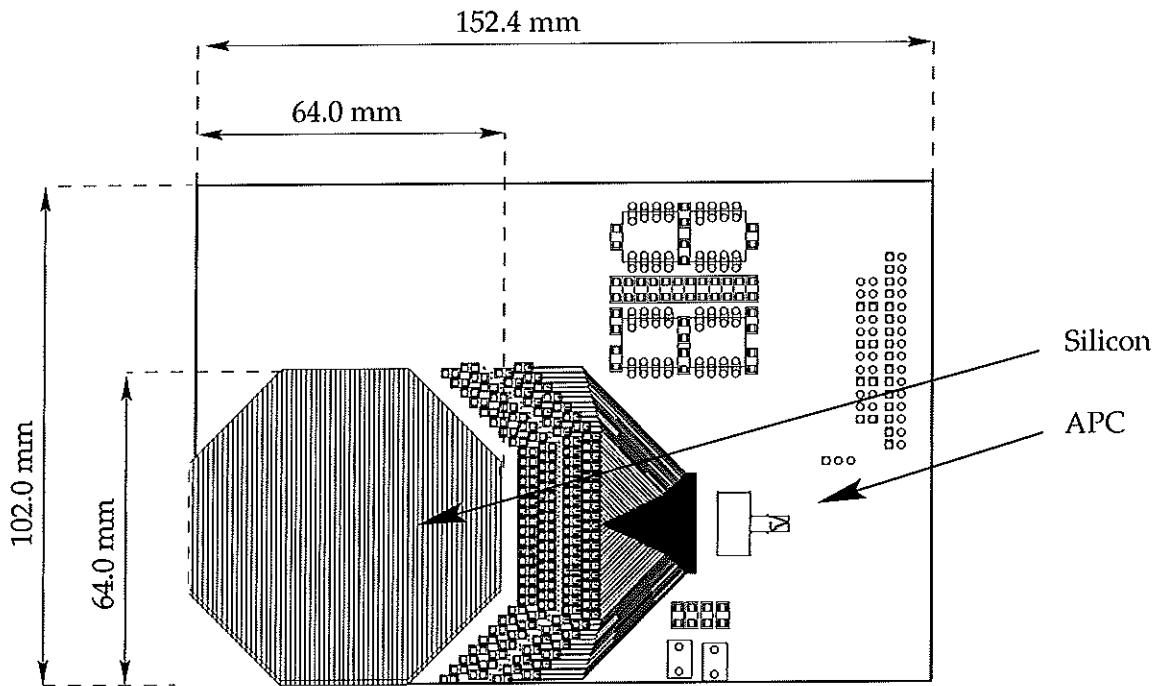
Layout of a single STC module, consisting of the carrier board with the front-end electronics and the Silicon wafer.
